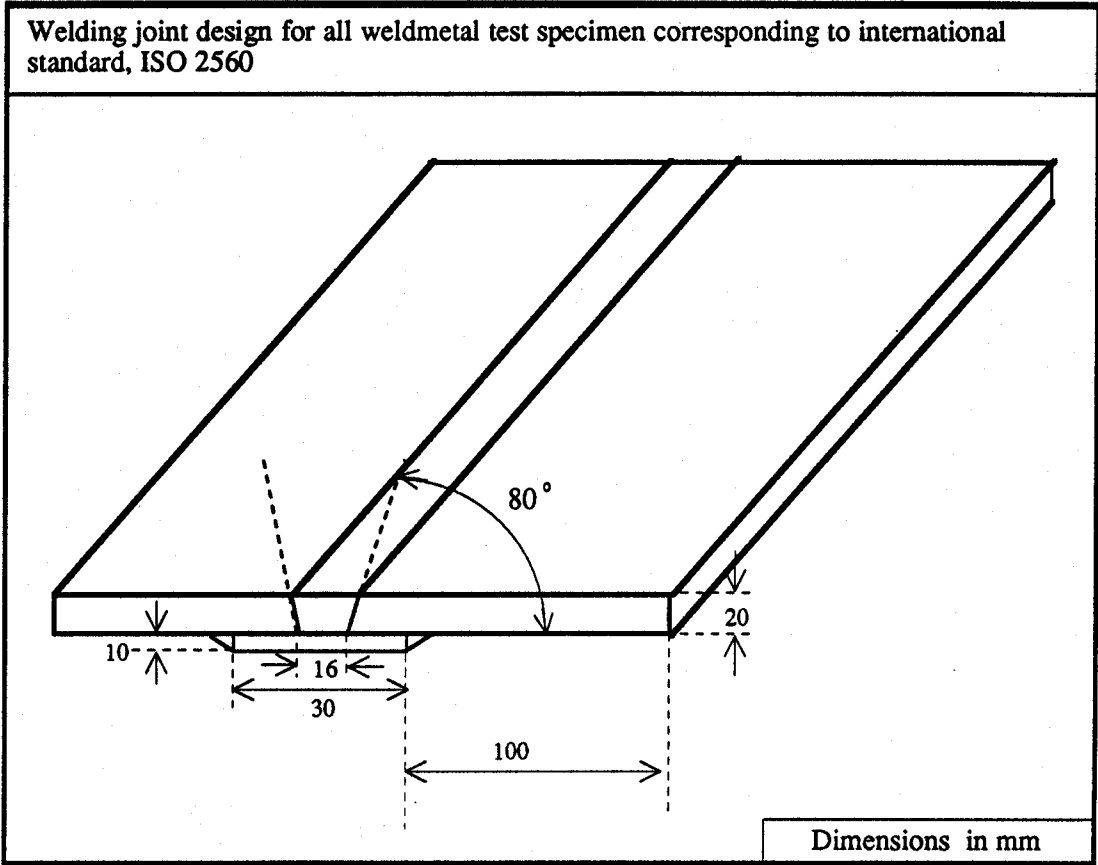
Illustration of all weld metal test specimen, used for preparation of welds, according to ISO 2560.
